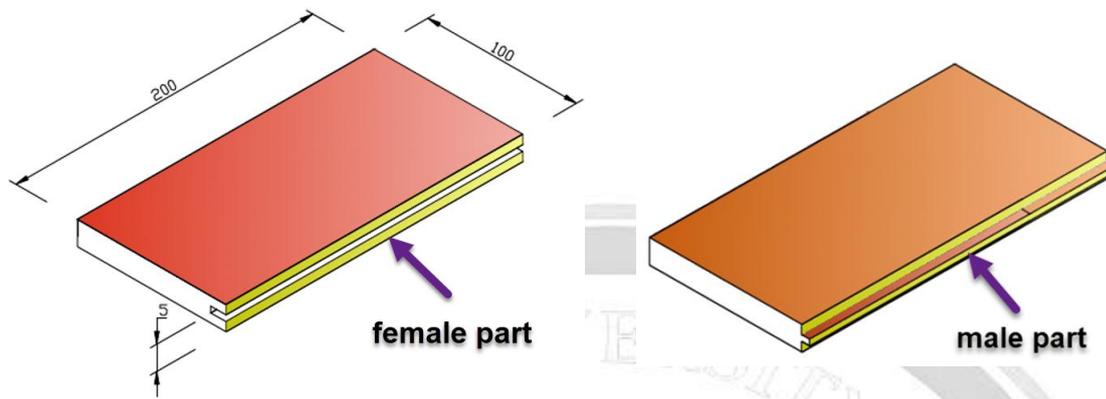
Welding Specimens with Male and Female Sides (dimensions in mm)
